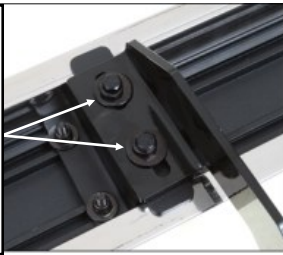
Slide & line up the U-Slider with the installed mounting brackets along bottom channel
